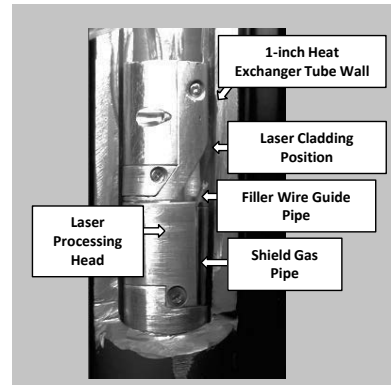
Laser processing head in a cut view of 1-inch heat exchanger tube.
